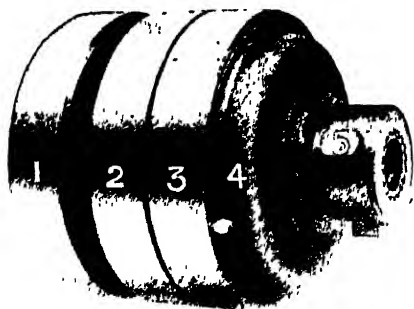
EXTERNAL VIEW OF THE EPICYCLIC GEAR ON THE LANCHESTER CAR
